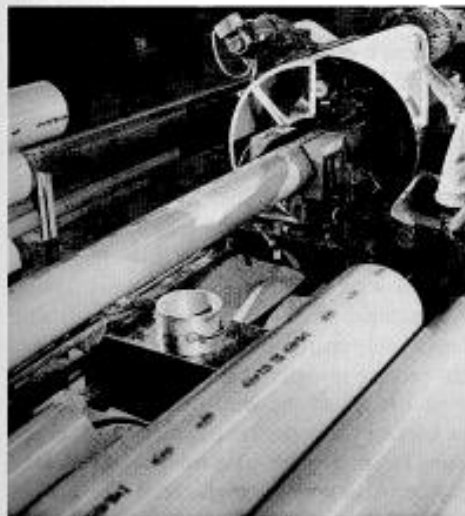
Extruding vinyl pipe. (Courtesy Goodyear)
